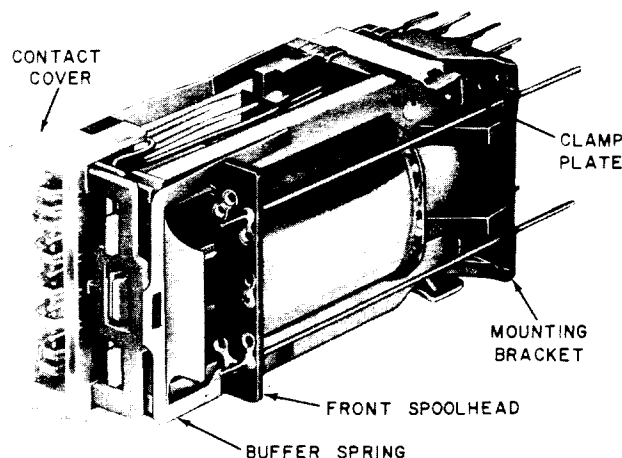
Wire Spring Relay Equipped With Buffer Spring—Front View
